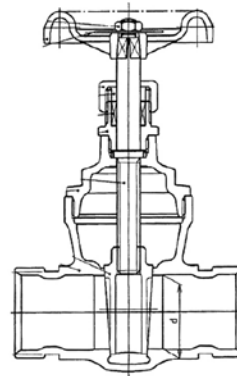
Housing type (valve sealed with a rubber ring after grooved pipes are connected to prevent them from slipping off)³
